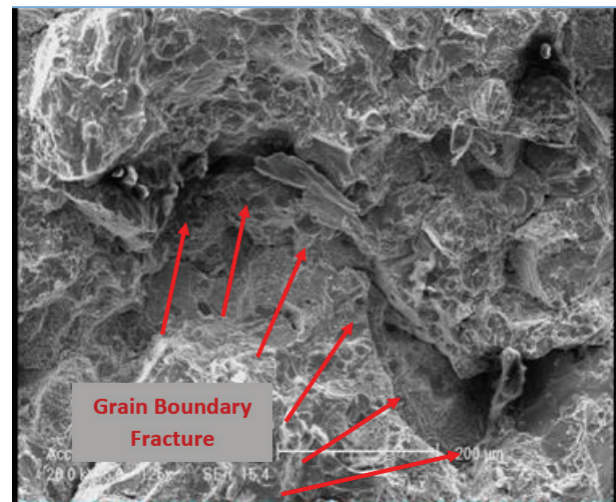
Typical fracture surface in welded specimen #1.
